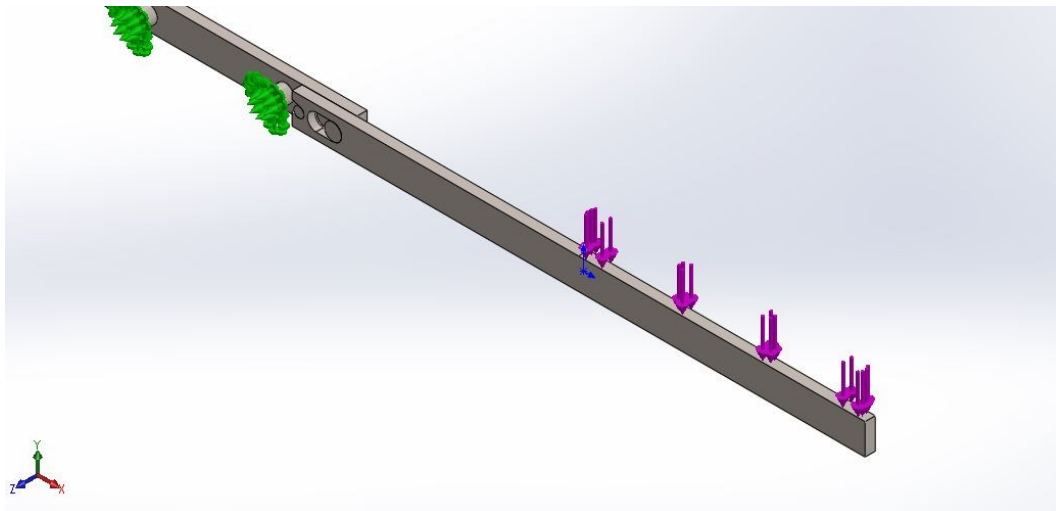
Applied load on the footrest railings for FEA on the footrest mechanism design
